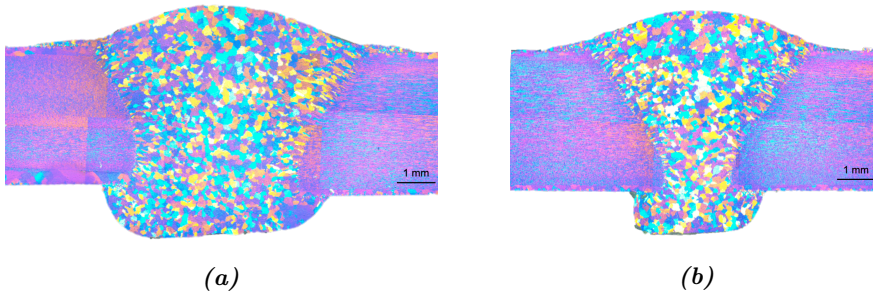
Optical micrographs of weld cross-section of weld speed (a) 14 mm/s and (b) 18 mm/s showing the recrystallized fusion zone.
